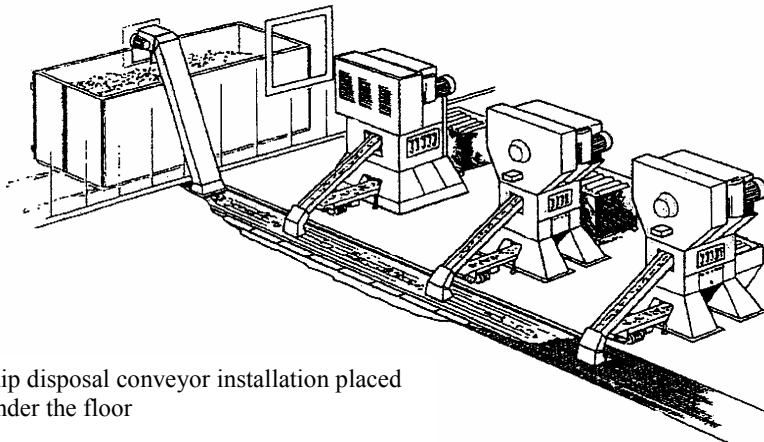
Chip disposal conveyor installation placed under the floor
